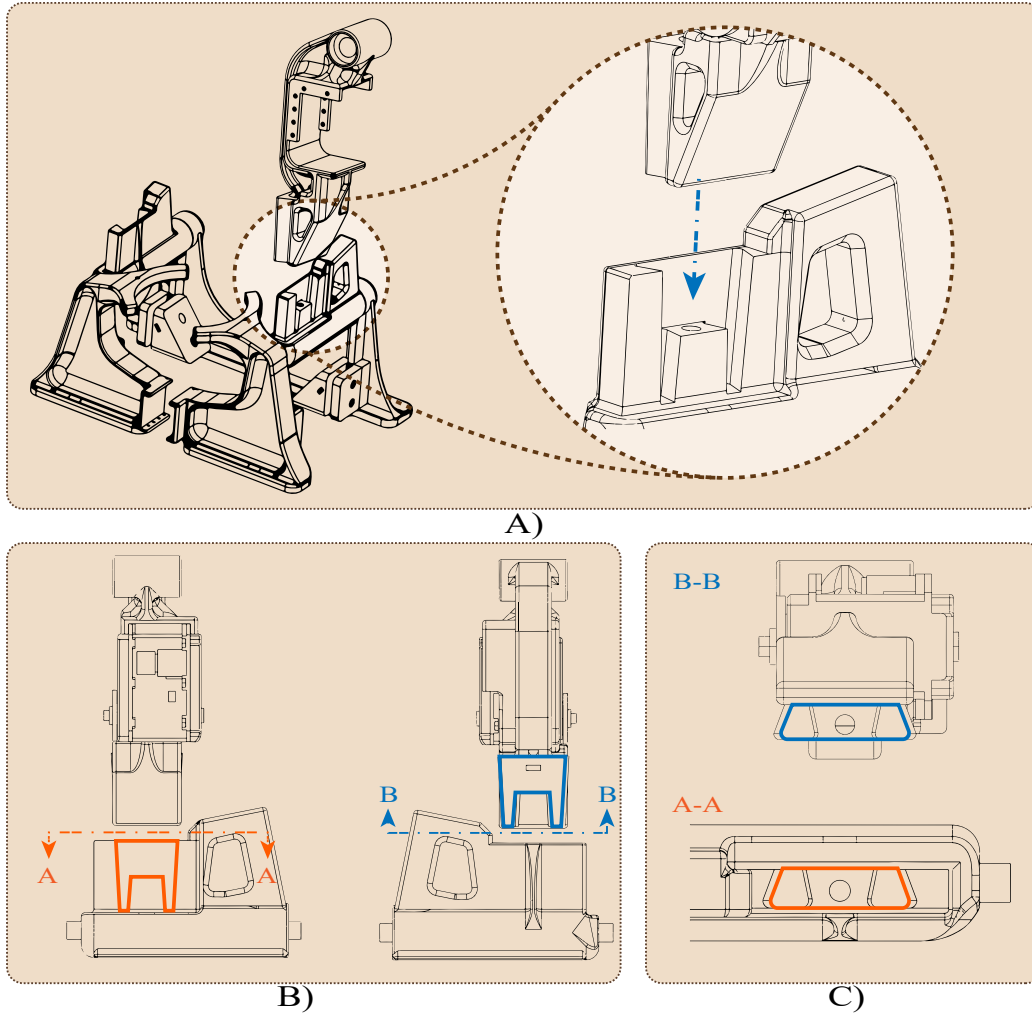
Diagram of dovetail design A). B) shows the side views of the segments, emphasizing the trapezoidal geometry that reinforces the joint between the two pieces that interlock. C) shows the views of the A-A and B-B cuts representing the geometry of the top view of the socket, in the fitting pieces.
